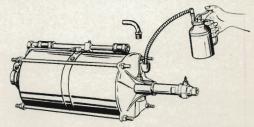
Tandem Piston without Lubrication Ports. (lubrication of forward piston)
